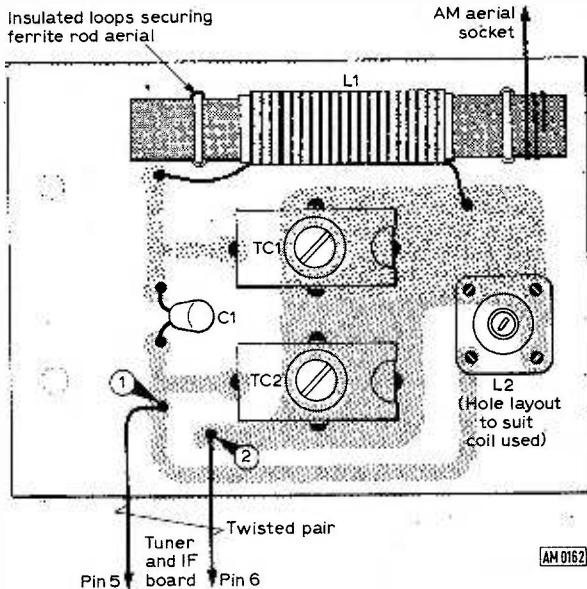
Location of components and actual size layout for the AM Tuner Board.
